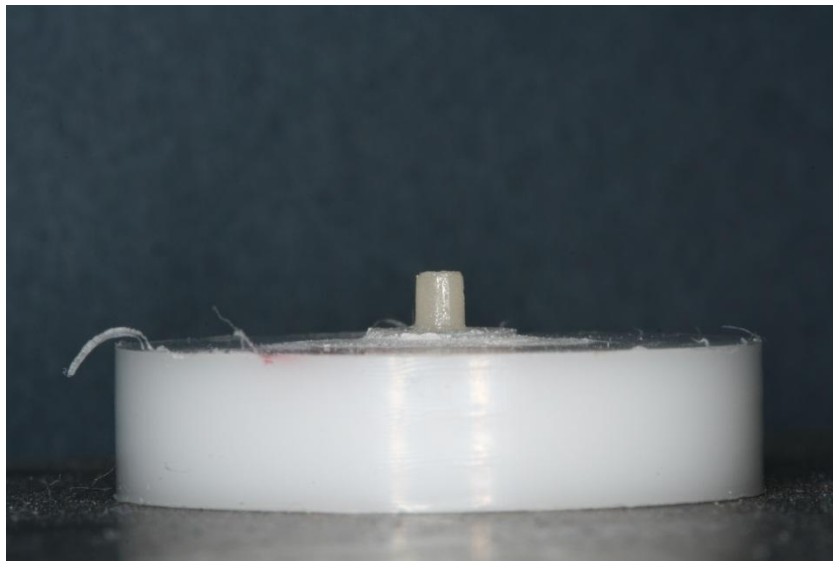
Macrophotograph of horizontal view of embedded specimen.
